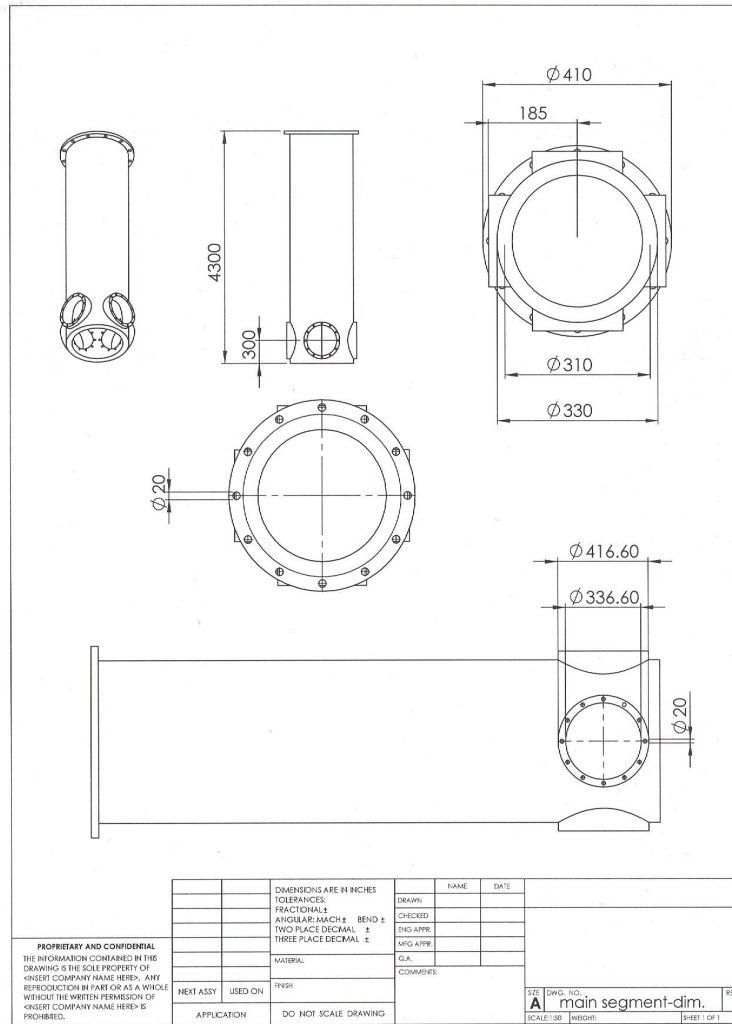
illustrates the drawing view of the main segment with parameter by the Solidworks.
